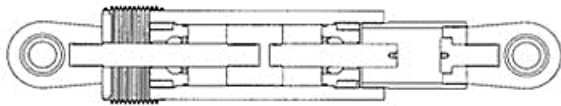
FVD cross section (Taylor 2017) Figure 2. Diagonal FVD in a building
